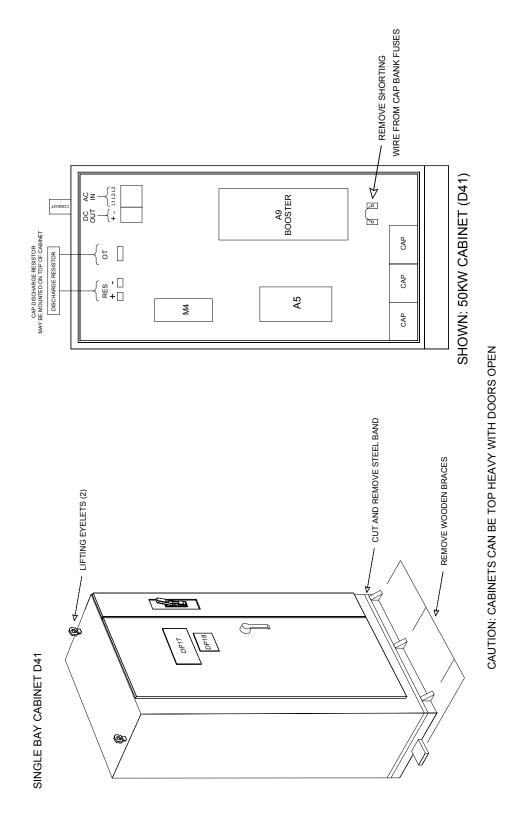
Mounting Instructions for D4x Series Cabinets
